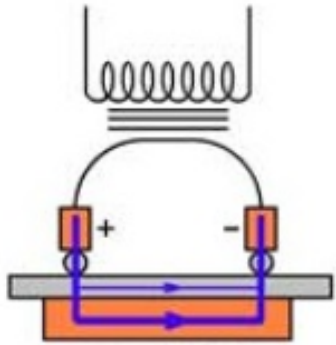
Cross-wire welding layout. The arrows show the path the current takes.
